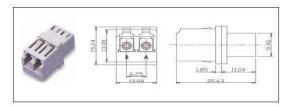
LC RJ45 Duplex Adaptor Appearance & Dimension
